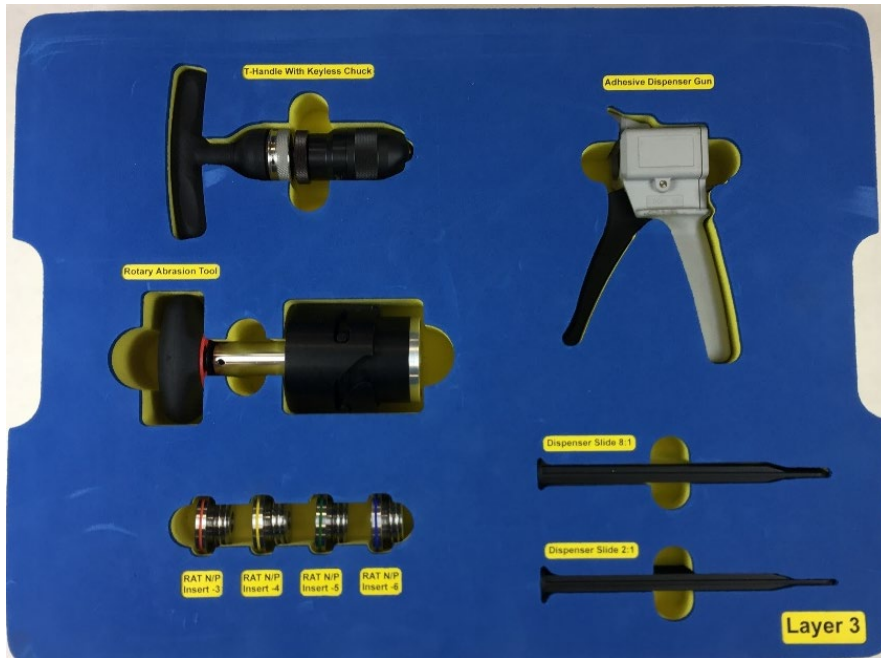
Surface Preparation Kit – Layer 3: T-handle, Rotary Abrasion Tool (RAT) with Inserts and Adhesive Dispensing Gun with Slides
